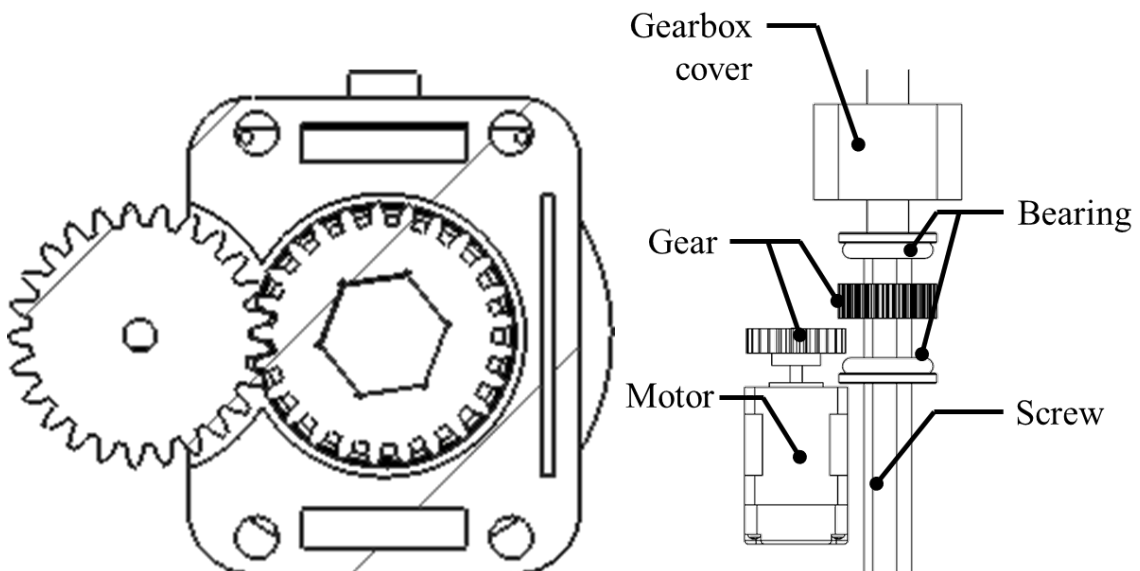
6 Gears and pin-jig shapes for power transformation from motor to pin-jig
